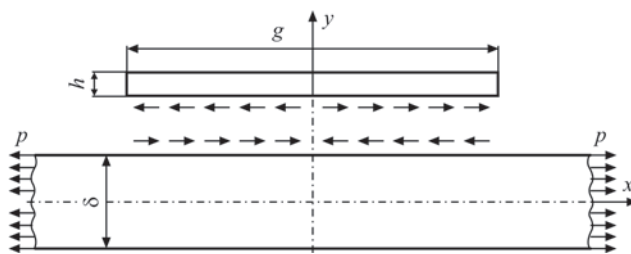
Scheme of loading of separate parts of model of butt welded joint with rectangular projection
